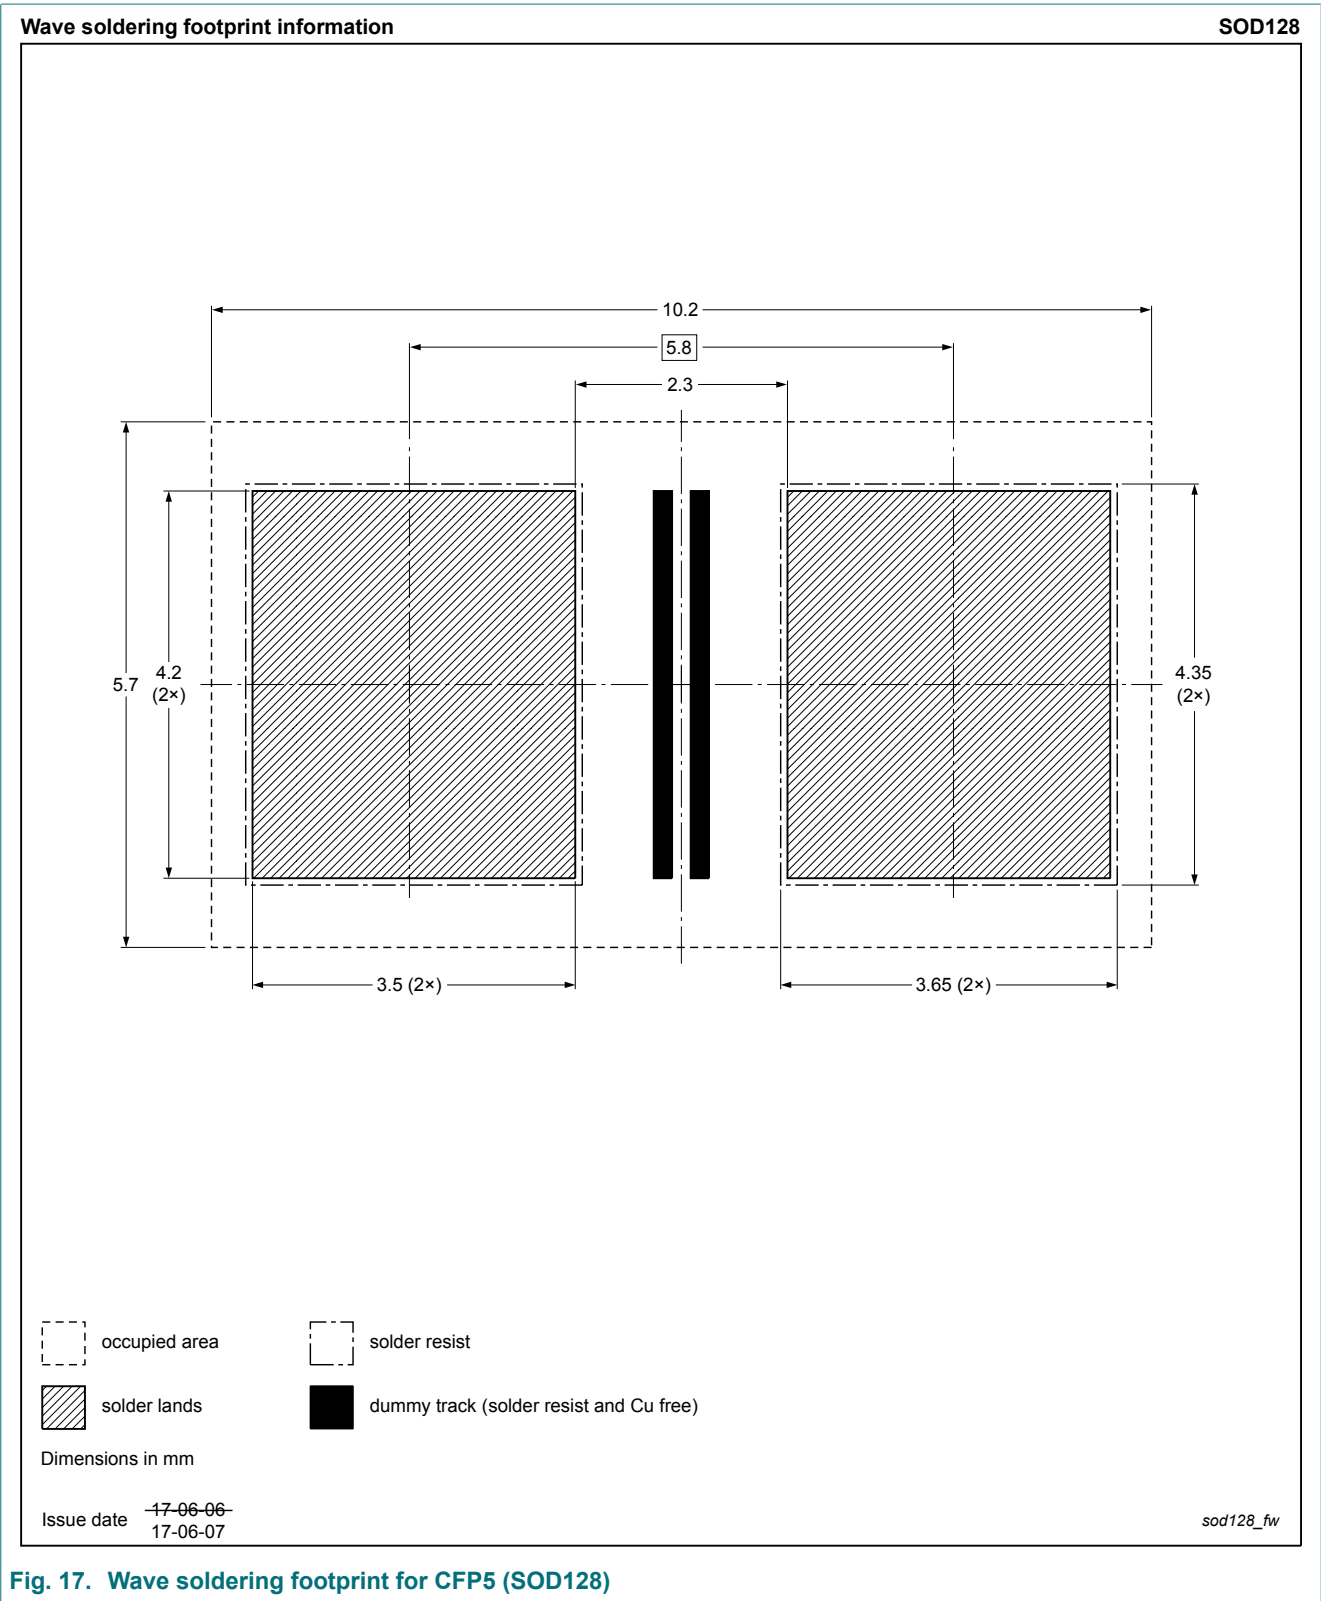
Wave soldering footprint for CFP5 (SOD128)
